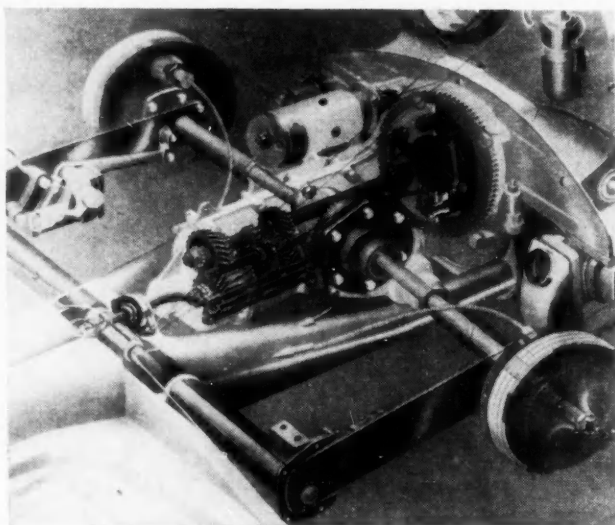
Rear axle assembly of the Volkswagen showing the two torsion bars splined at both ends
